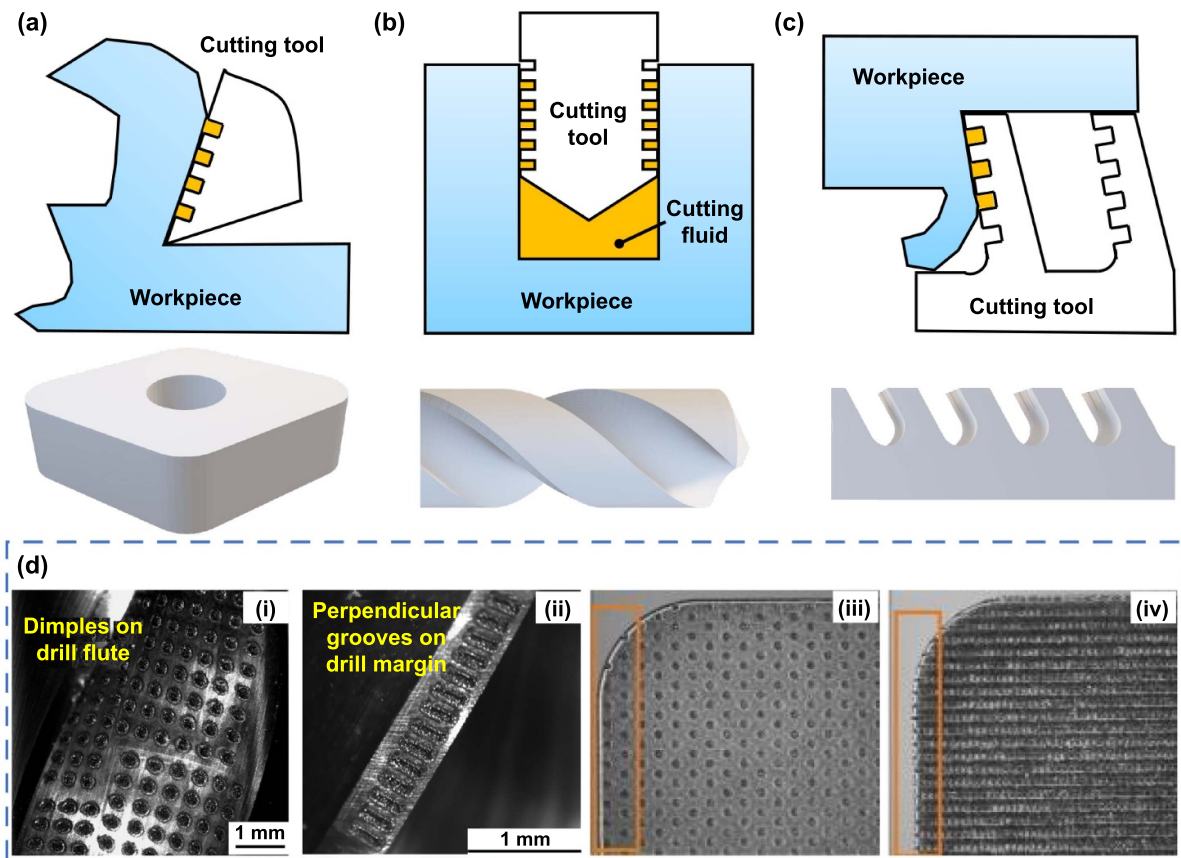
Cutting tool. (a) Microtextures turning tool cutting mechanism and topography. (b) Microtextures drilling tool cutting mechanism and topography. (c) Microtextures broaching tool cutting mechanism and topography. (d) SEM image of microtexture tool. (i) and (ii) Microtextured drill. Reprinted from [290], © 2023 The Society of Manufacturing Engineers. Published by Elsevier Ltd All rights reserved. (iii) and (iv) Microtextured turning tool. Reprinted from [291], Copyright © 2014 Elsevier B.V. All rights reserved.
